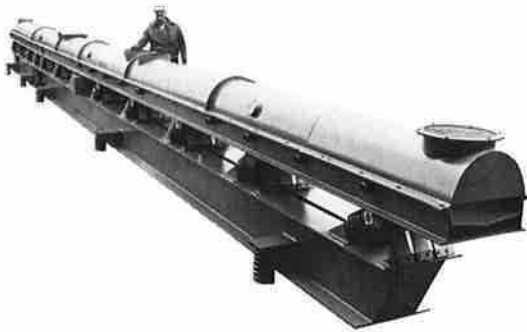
A typical casting cooling conveyor. This 24-in. wide by 65-ft. long unit consumes less than 2 HP and is fully adjustable in its output.
